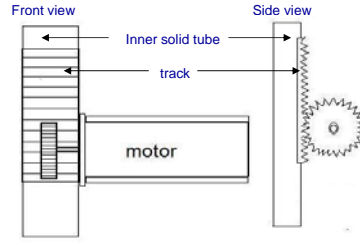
Sketch of front and side view of motor, gearing, gear track and inner solid PVC tube
